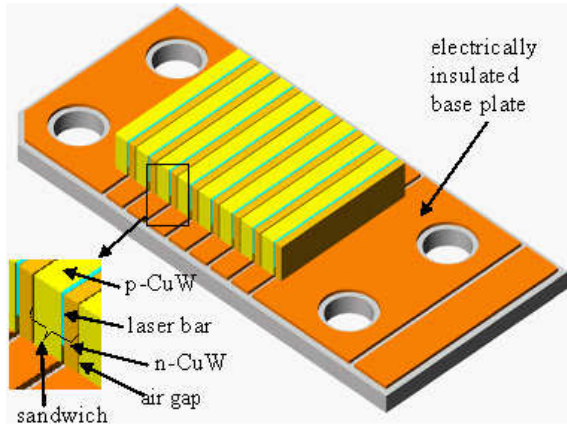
Schematic drawing of the passively cooled laser stack. The small figure shows a magnified section of a sandwich with laser bar and p- / n- CuW heat spreader and air gap.
